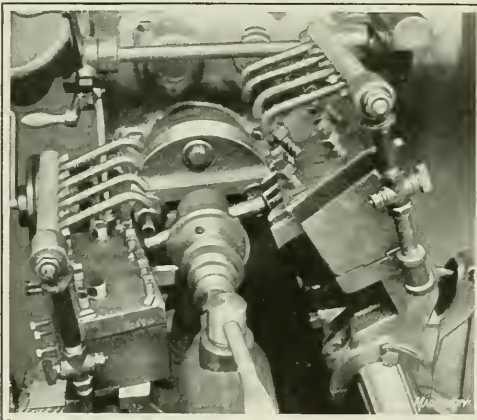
Machine equipped for taking the Turning and Forming Cuts on a Cluster Gear
